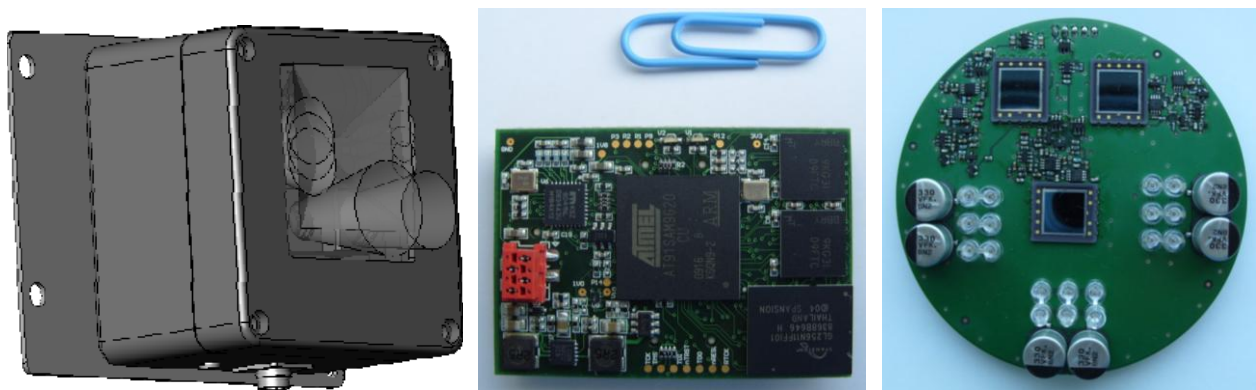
V2V Communication Module (left: housing, center: base board, right: IR board)
